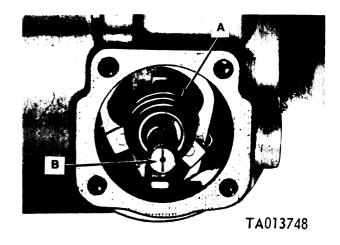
Installing operating shaft spring and plate on operating shaft (code A pumps).
